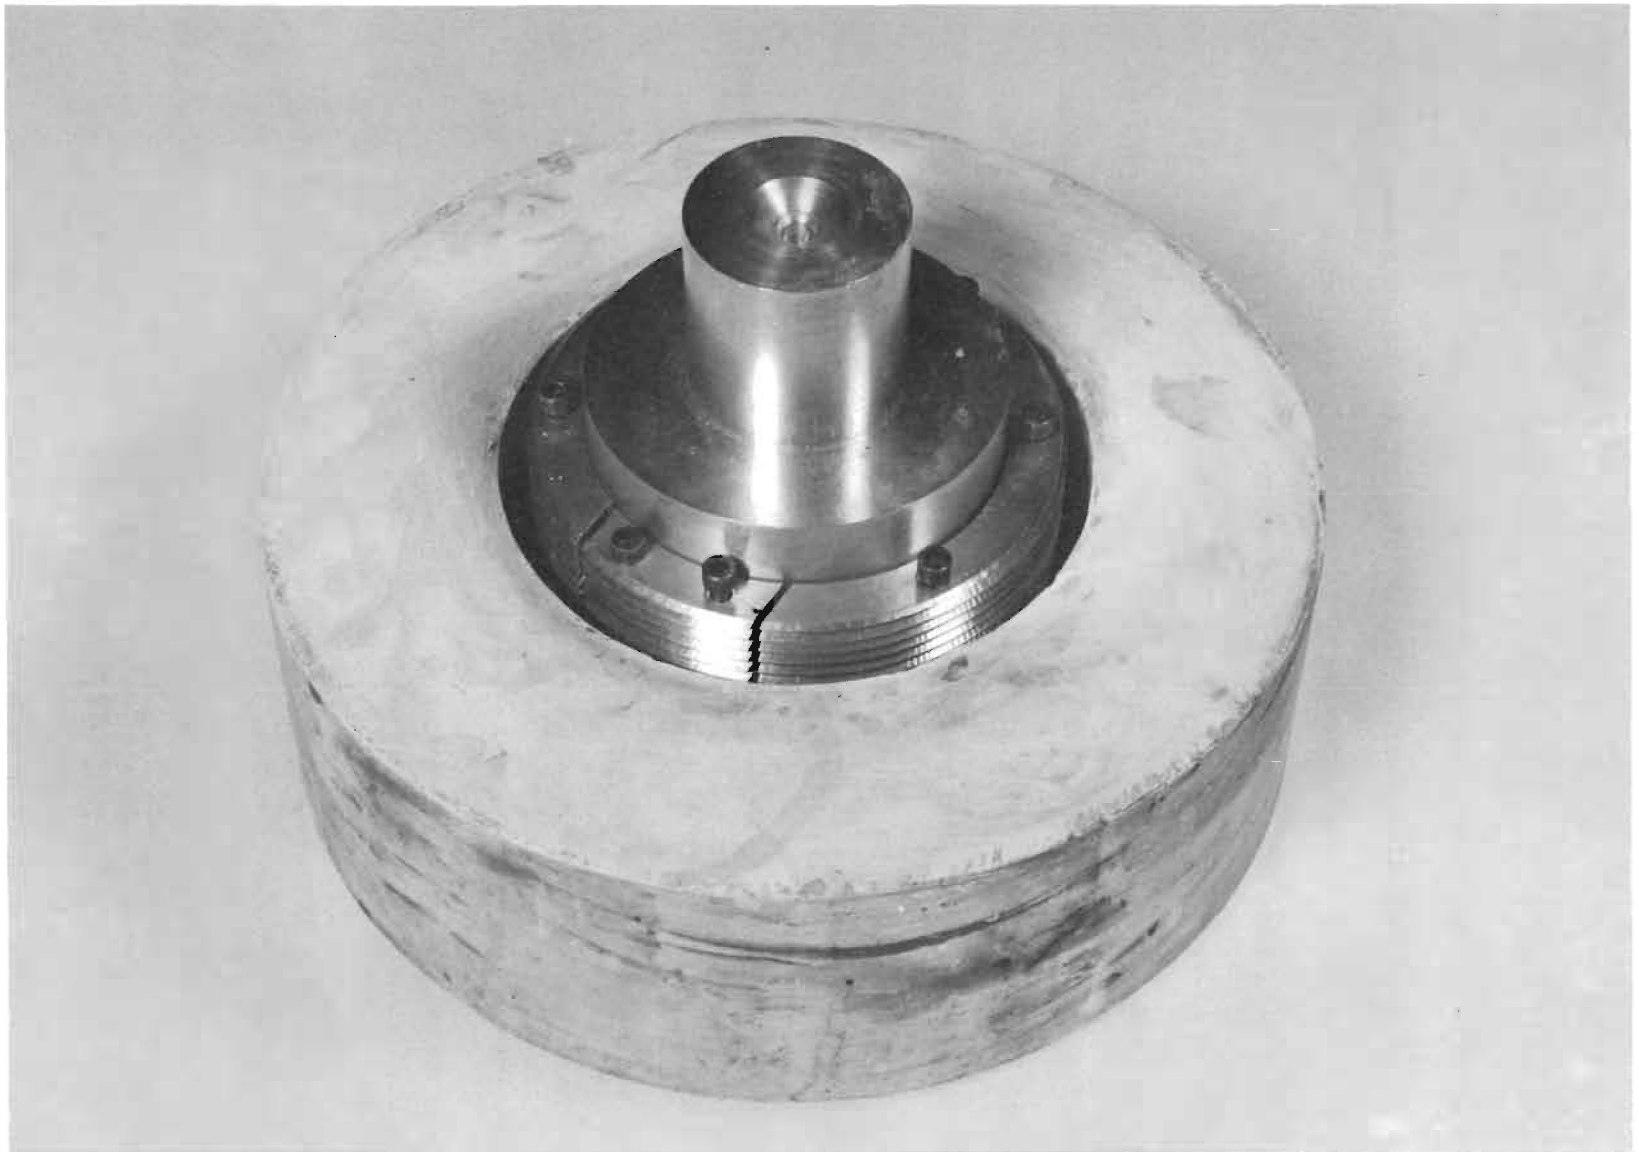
Assembled Mold for Slip Casting Threaded Silicon Attachment Ring.
